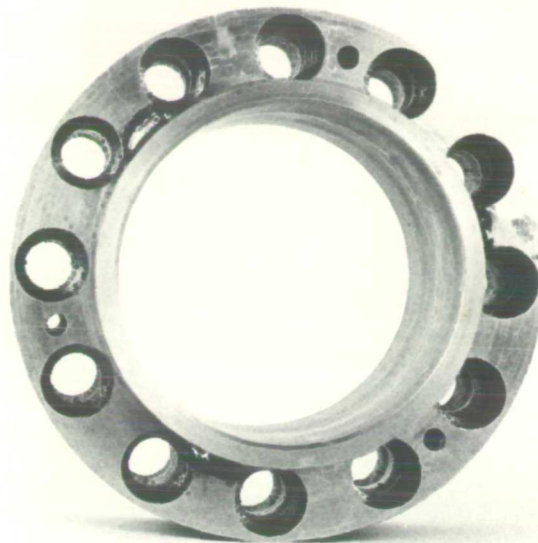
TOP VIEW OF MILD STEEL TOP RING
